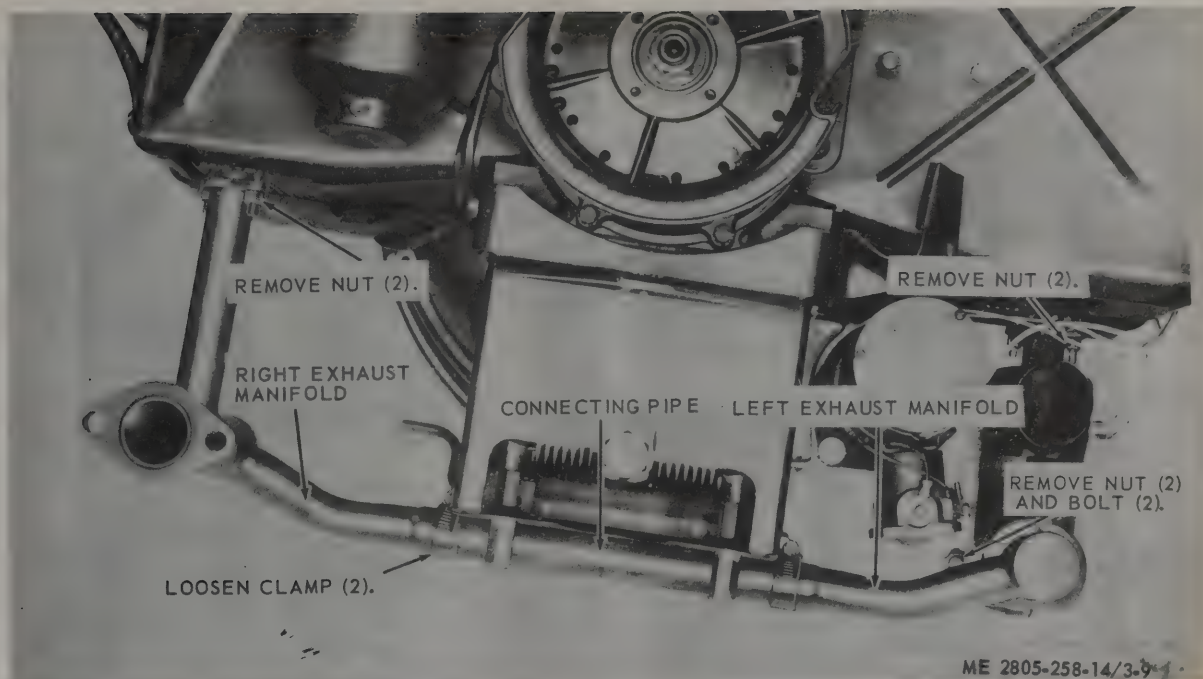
Exhaust manifolds and connecting pipe, removal and installation.
